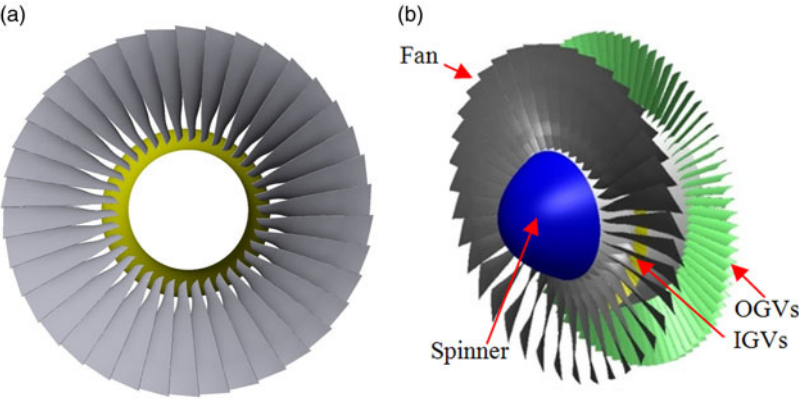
CAD models: (a) Fan rotor (b) Fan stage components.
